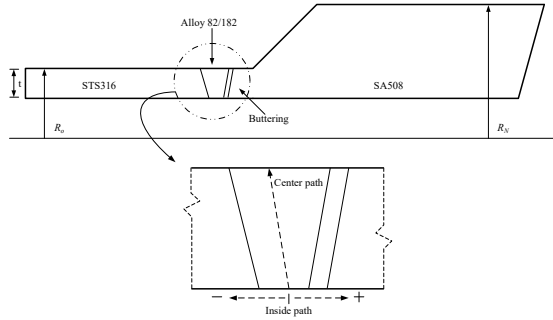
Welding part of dissimilar metals and estimation paths in welding area for data acquisition [5].
